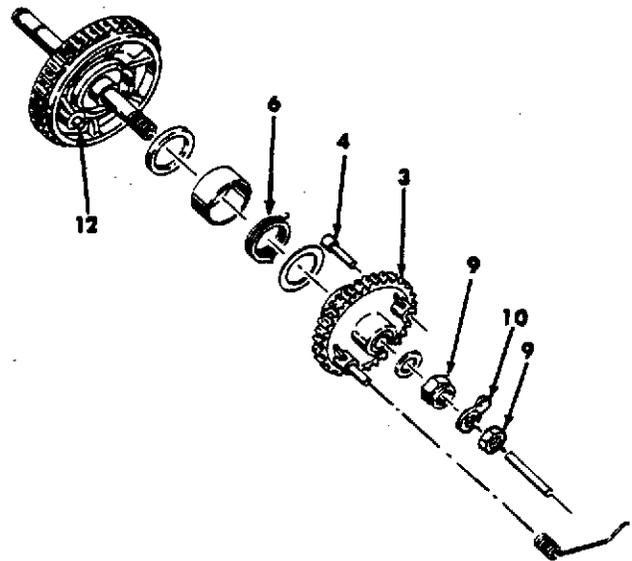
FEED SPROCKET CLUTCH COMPLETE
